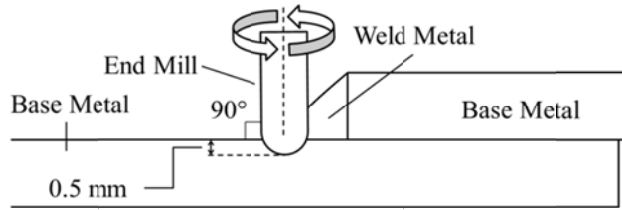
A schematic of post-weld milling of the FOZ using a ball-nose end mill
